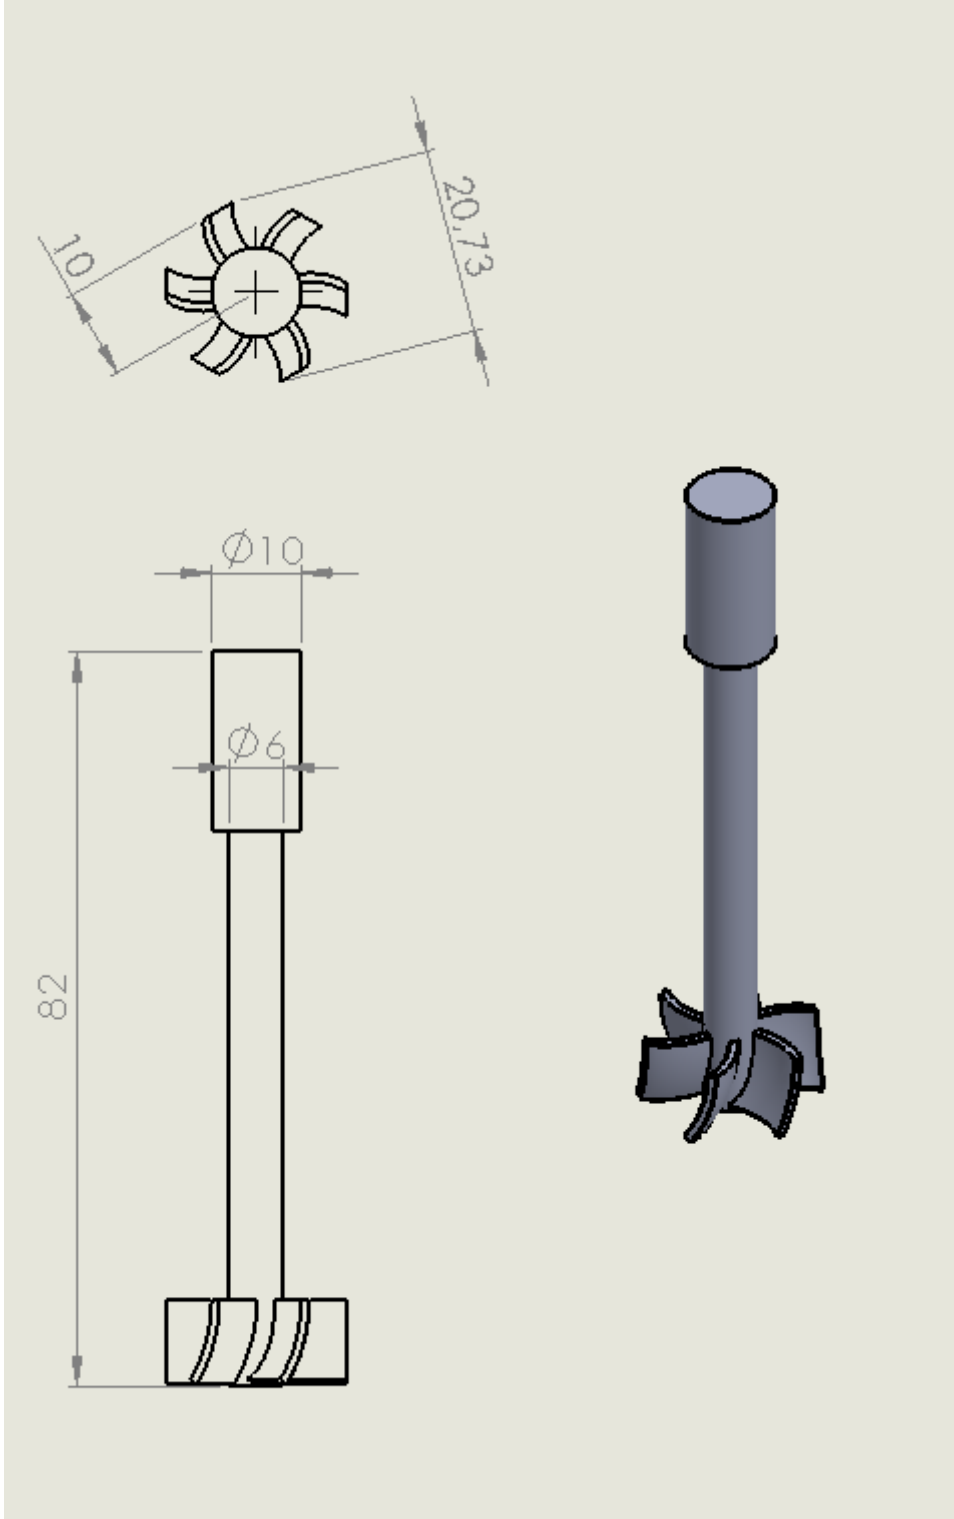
Drawing of the “Rheometer propeller” with dimensions.
